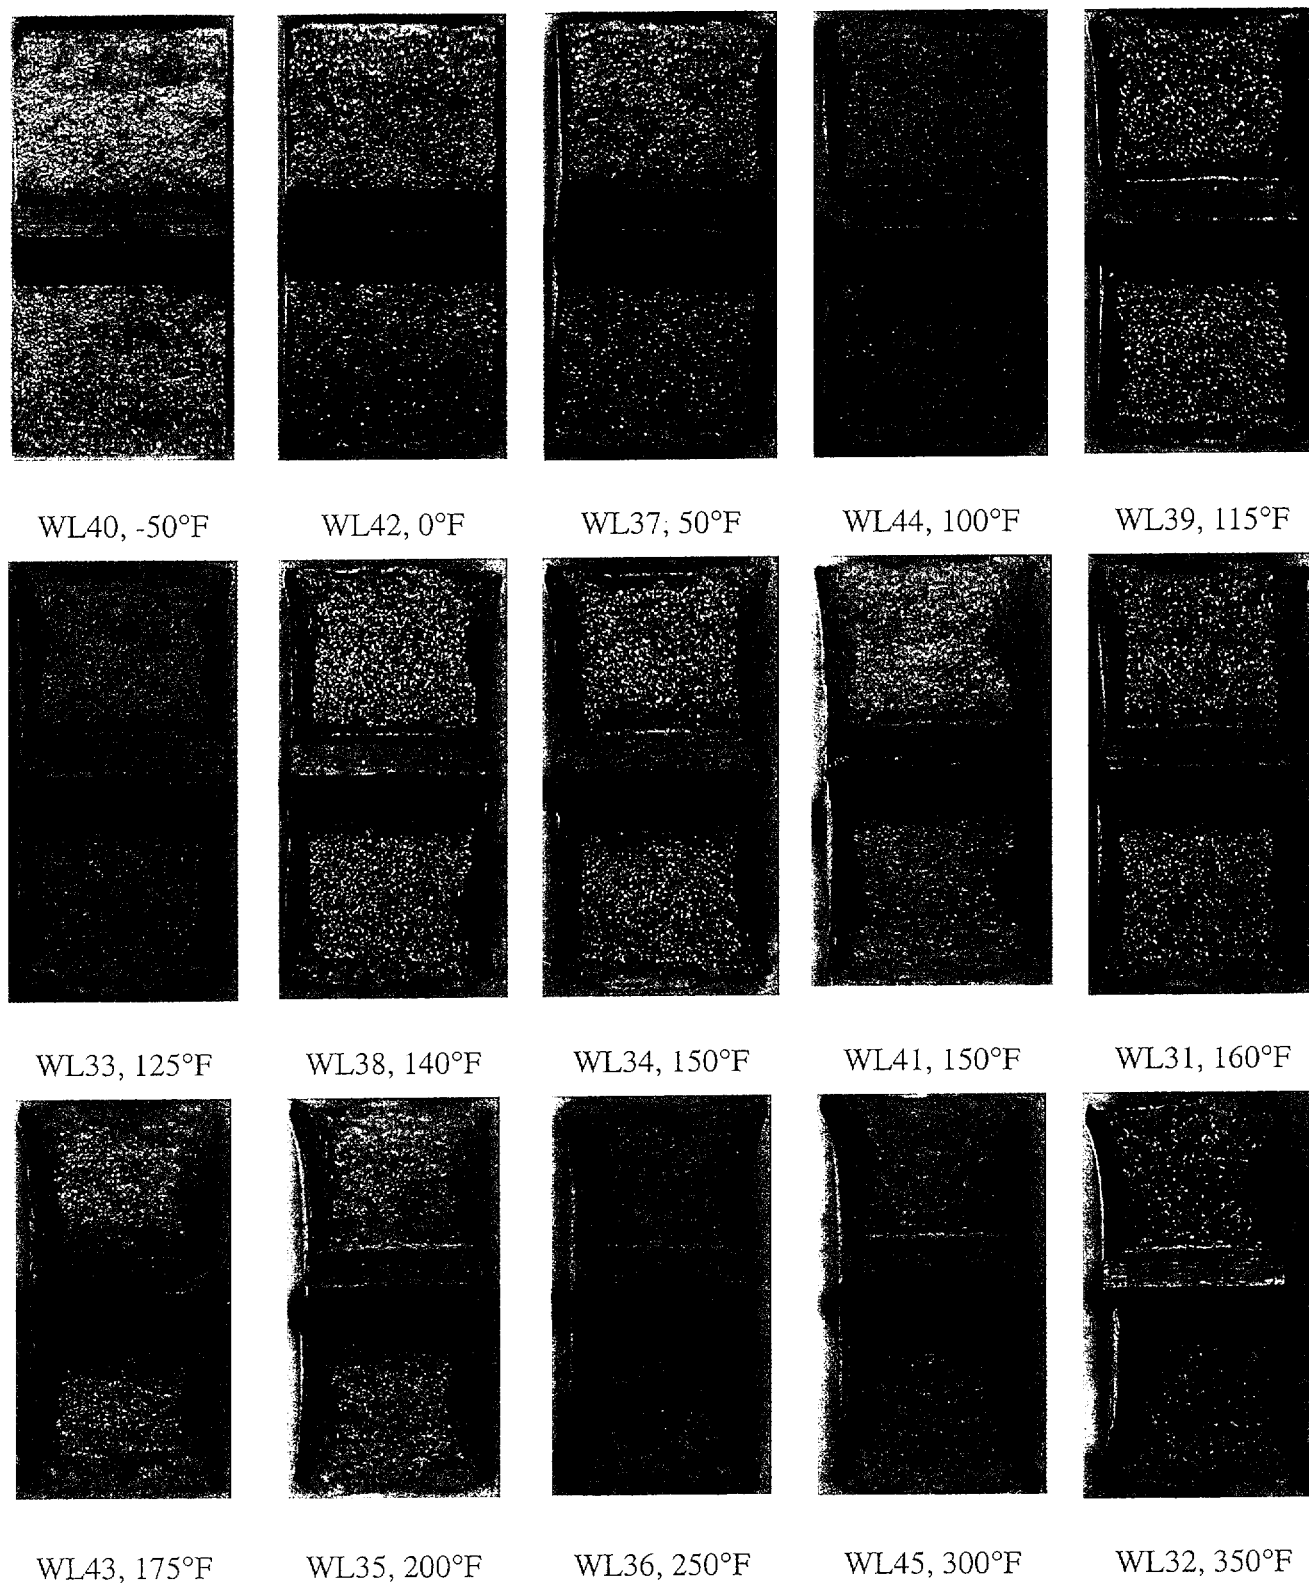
Charpy Impact Specimen Fracture Surfaces for Beaver Valley Unit 2 Reactor Vessel Intermediate Shell Plate B9004-2(Longitudinal Orientation)
